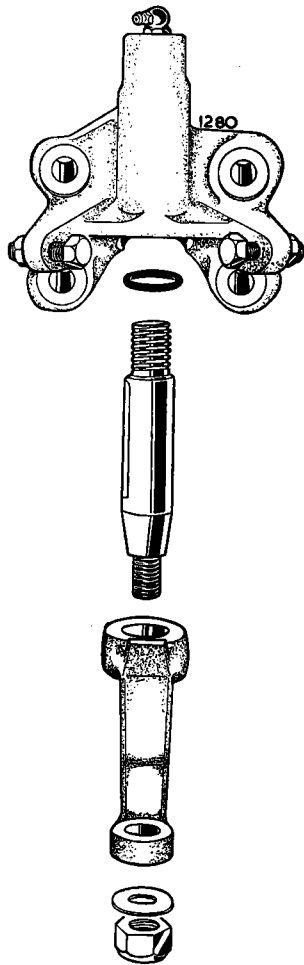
Exploded view of the steering idler assembly. (early cars)
